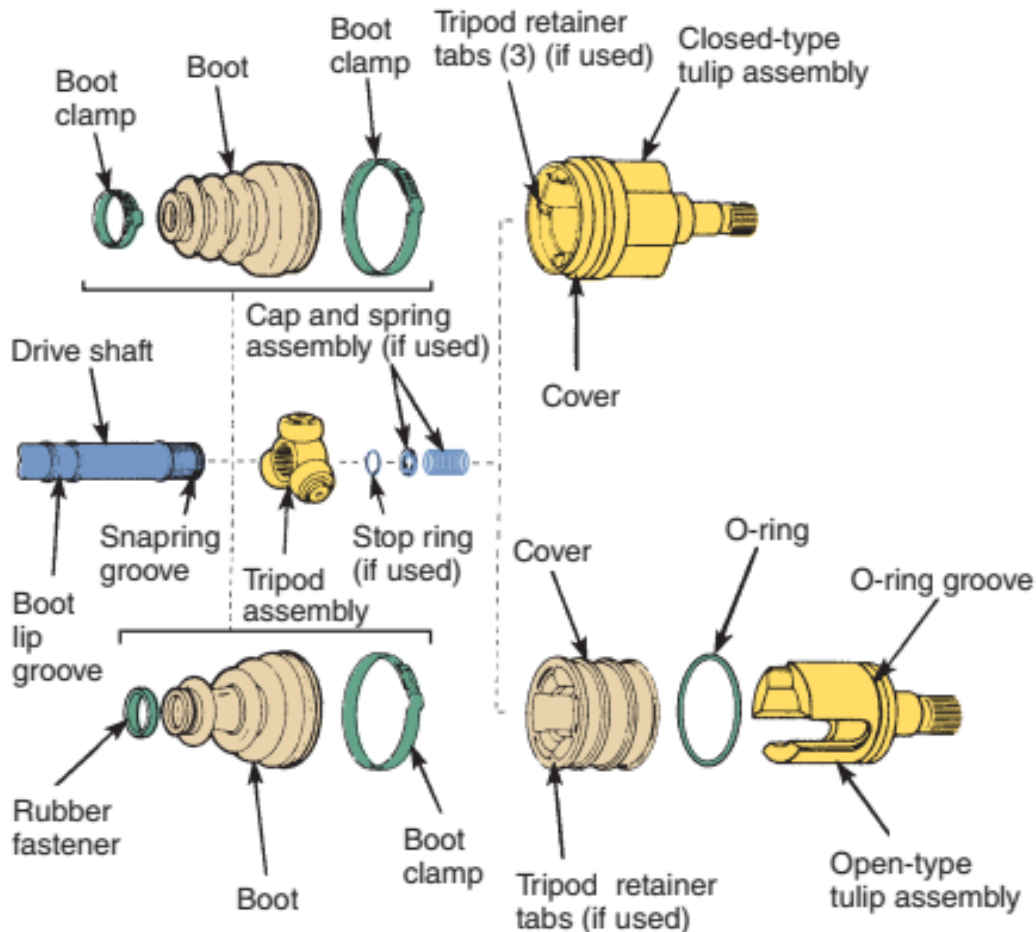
Inner tripod plunge-type joints: closed housing and open housing
